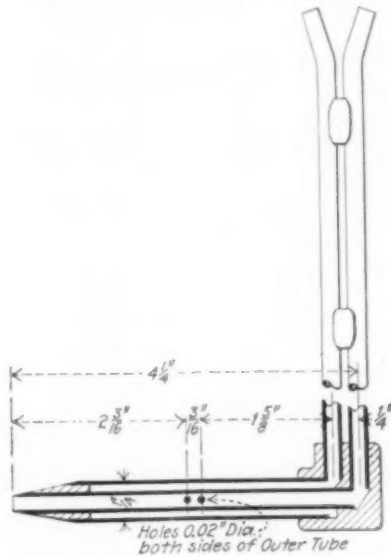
DIMENSIONED SKETCH OF PITOT TUBE Y
